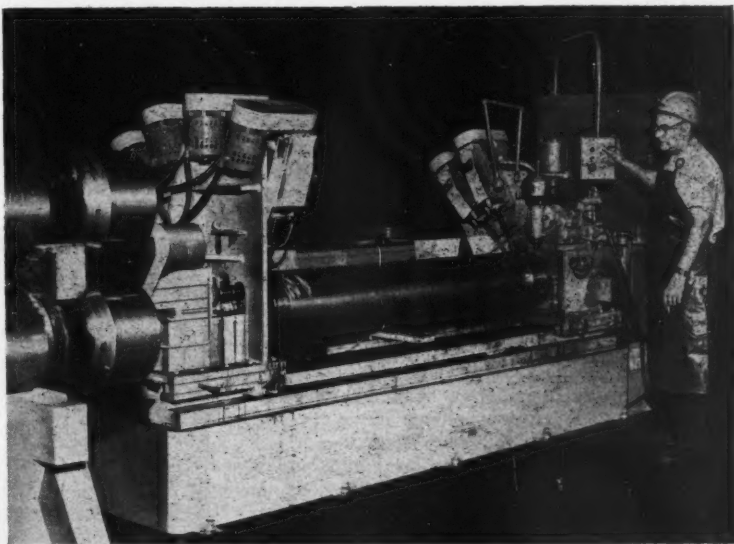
This automatic drilling and tapping machine is employed for operations on three major components of the Littlejohn missile
